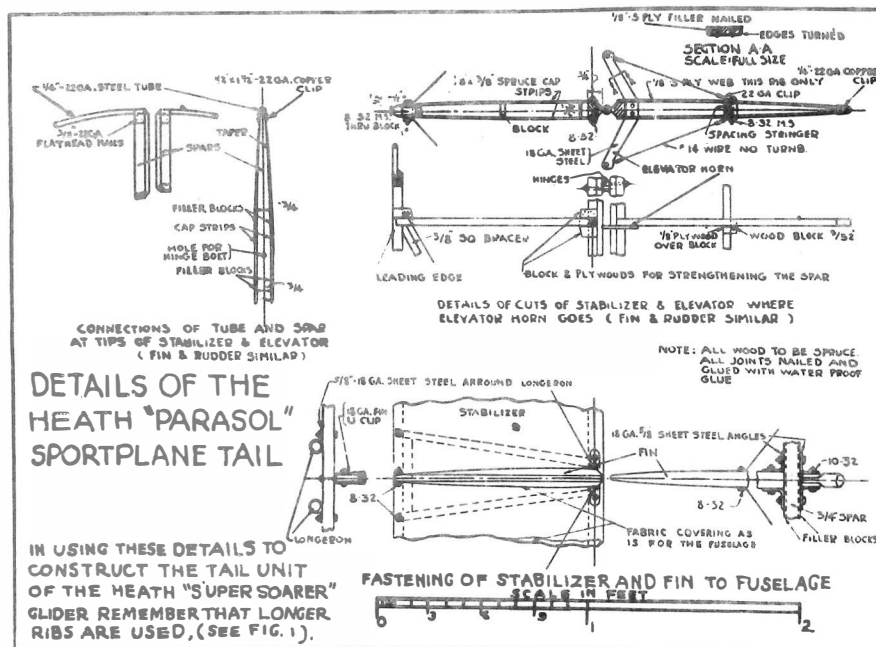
A mechanical drawing of the tail unit of the "Super-Parasol." The construction of the glider tail is essentially the same, except that the dimensions are larger. See Fig. 4 of first installment.
